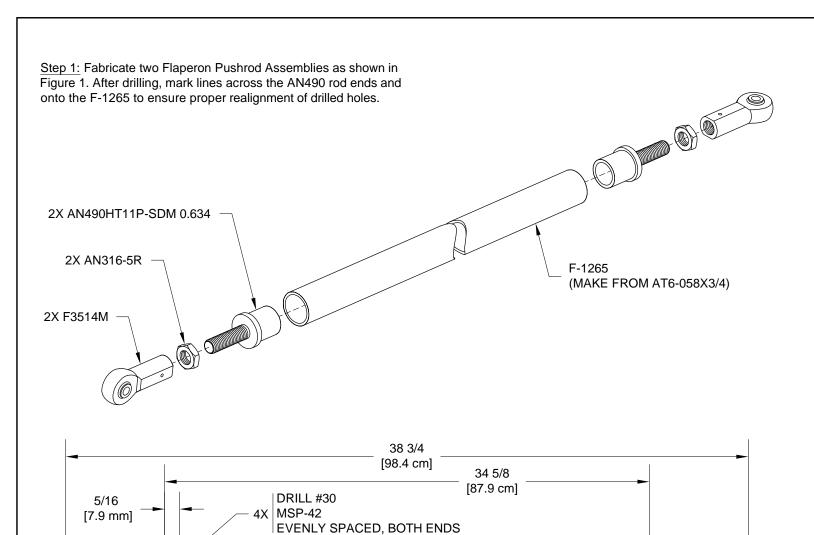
FLAPERON PUSHROD ASSEMBLY (TWO REQUIRED)
